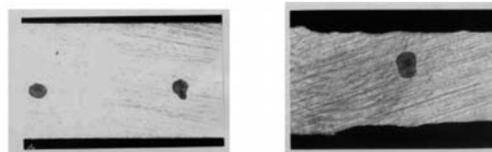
Test Piece Before Test Fig. 5 Test Piece After Test
